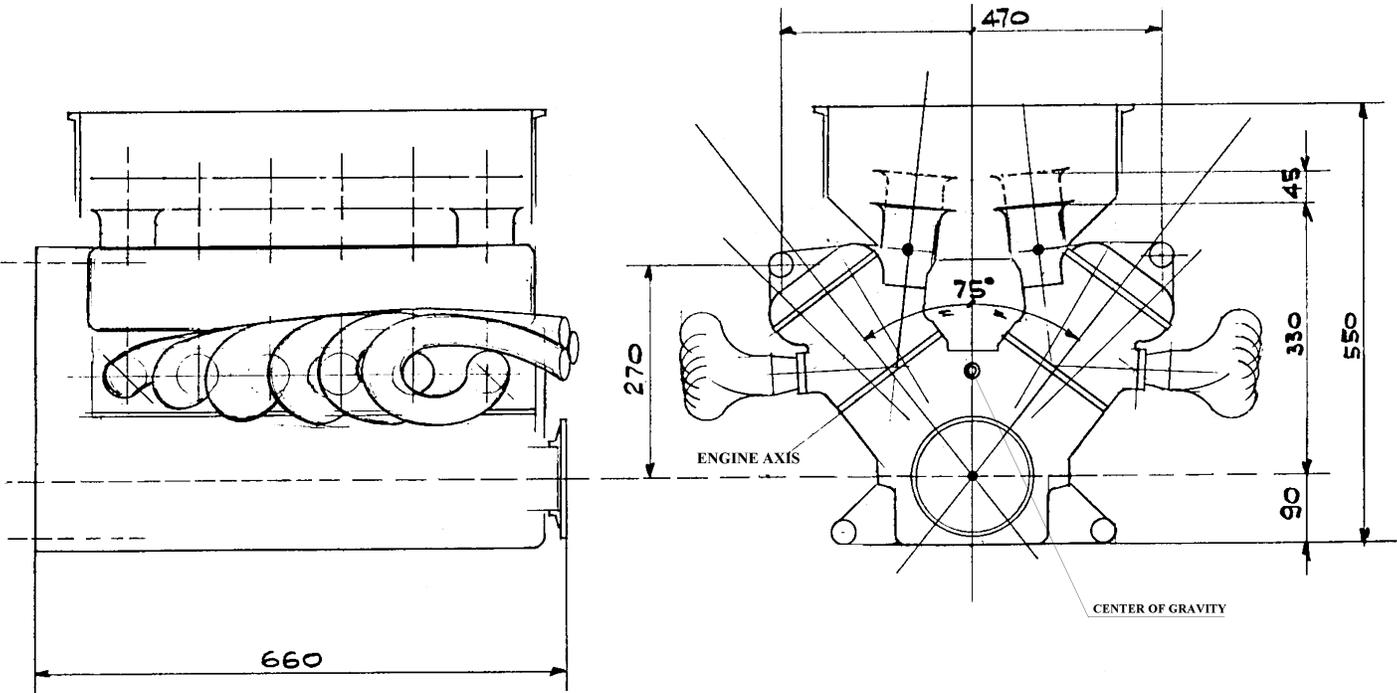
Lay-out of a traditional V12 engine. The engine is connected to the cockpit by 4 points.
